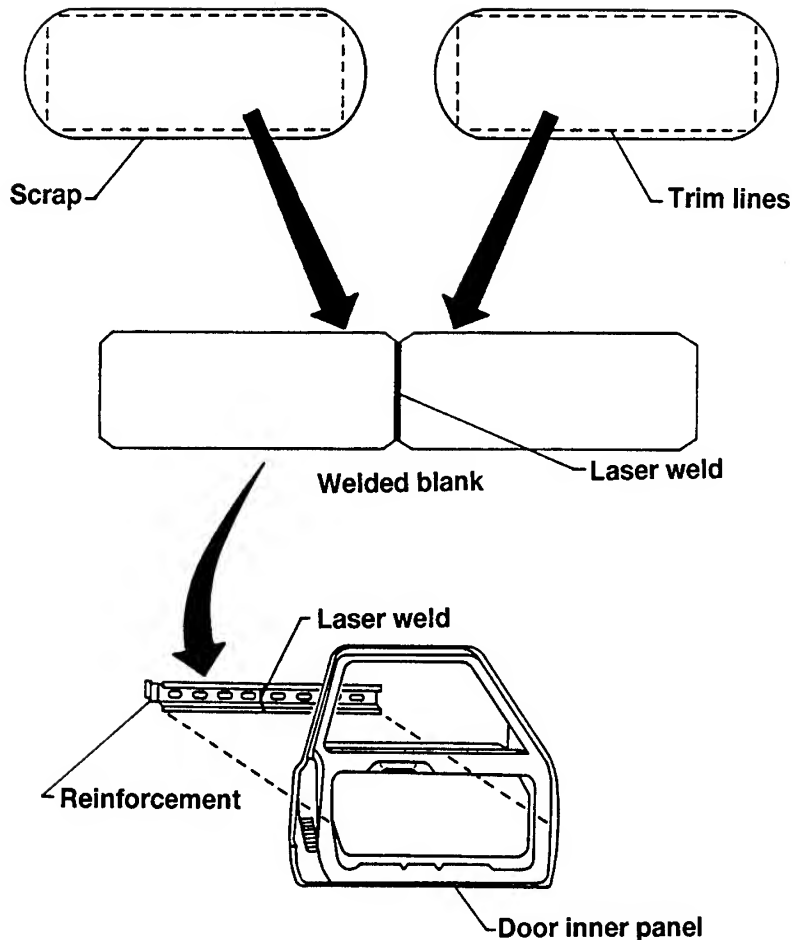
Engineered scrap from truck door cut-outs is laser welded and reused as a door reinforcement bar.
